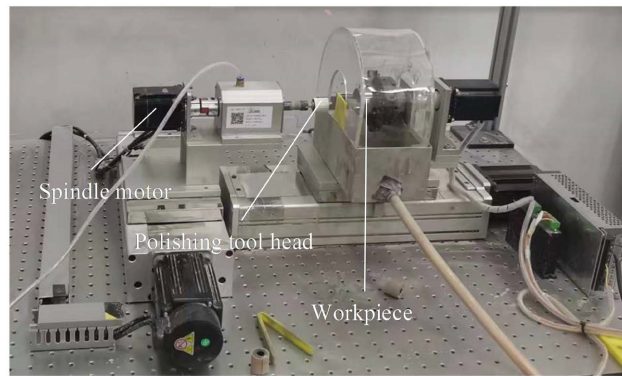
Bonnet polishing equipment for shaft sleeve parts
